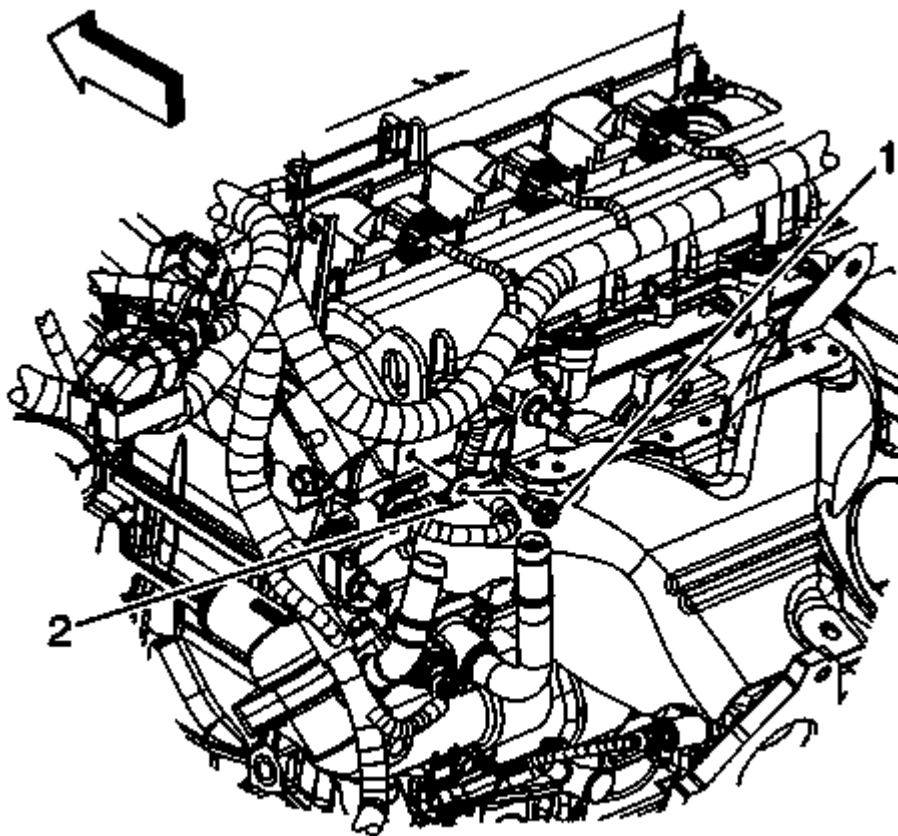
Locating Exhaust CMP Sensor Connector
